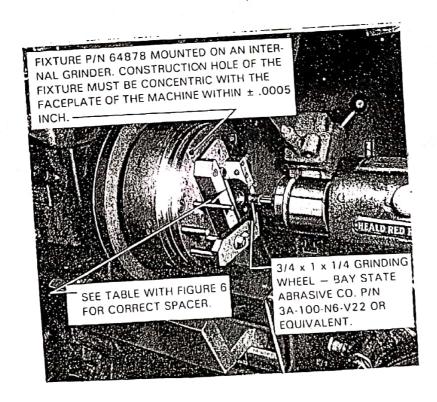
Counterweight and 64878 Fixture Assembled on an Internal Grinding Machine
